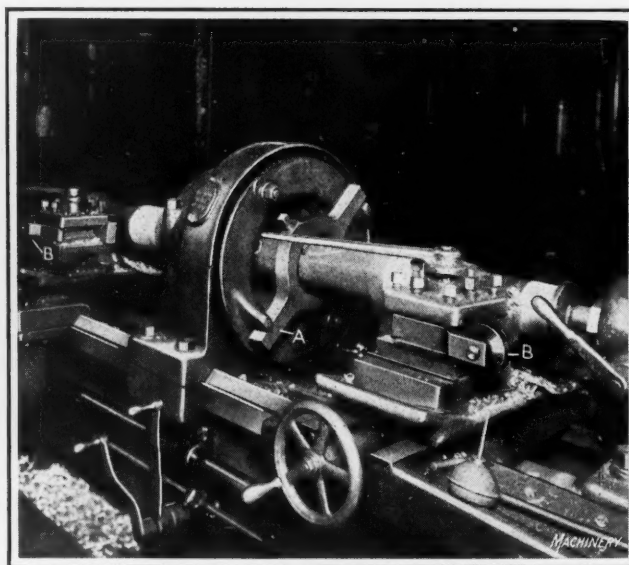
Duplex Axle Lathe with Center Drive, used for turning Journals and Wheel Fits on Axles
